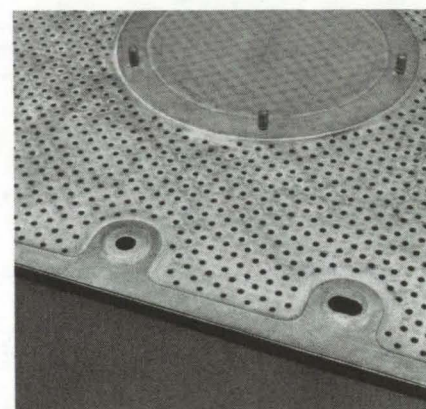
This Perforated Heat Exchanger was assembled, using alumina paper as a barrier between the braze alloy and the heating platens of the vacuum-brazing press. Note the smooth fillets.
